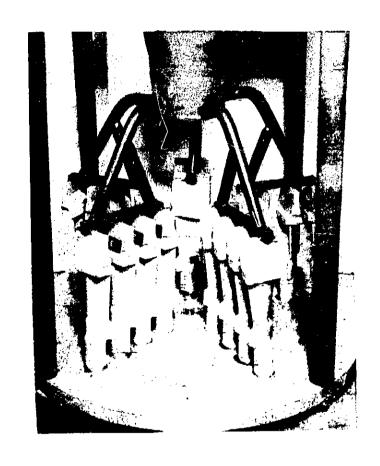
Wax Pattern Assembly for Exothermic DS Casting Twenty Task II Preliminary Design TFE731-3 Turbine Blades
